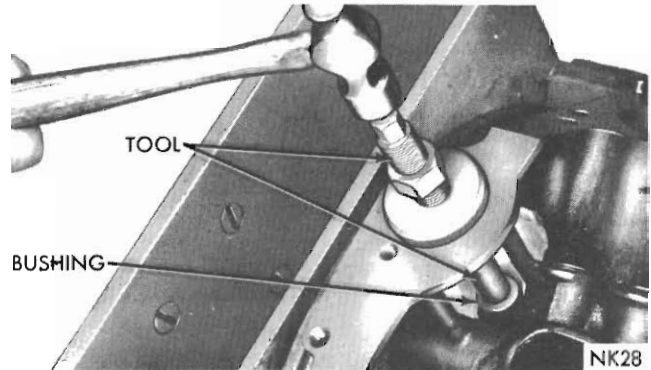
Installing distributor drive shaft bushing (Using Tool E9C65H)
